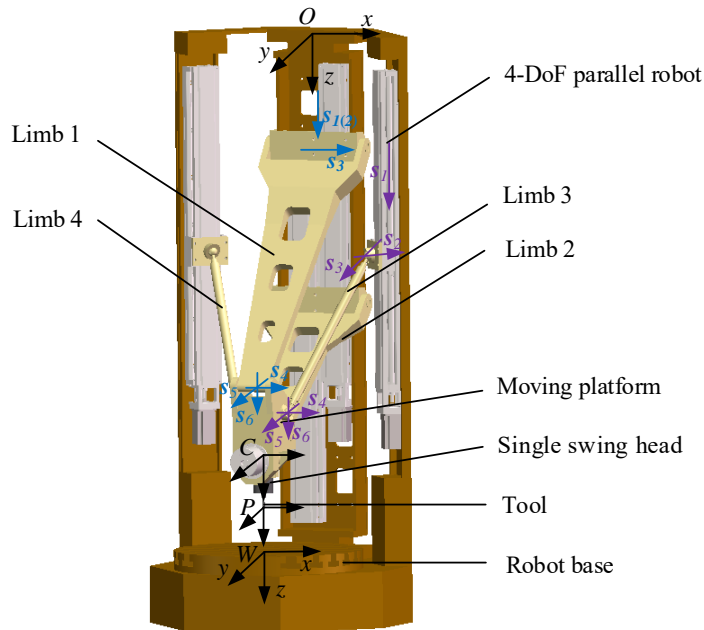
P (2-PRU/2-PUS) hybrid machining robot
